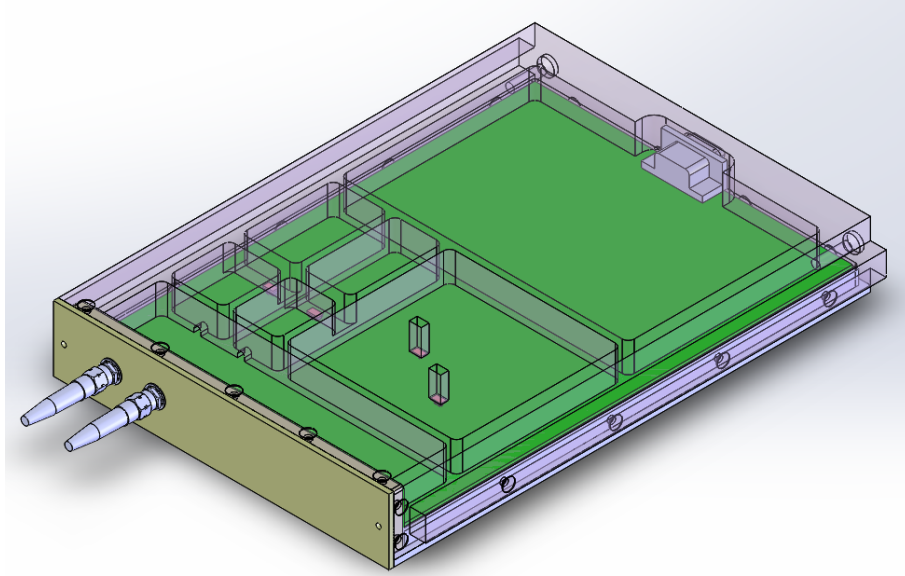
Isometric view of the Sample Clock Generator module showing the lid (transparent) touching down on hot components.
